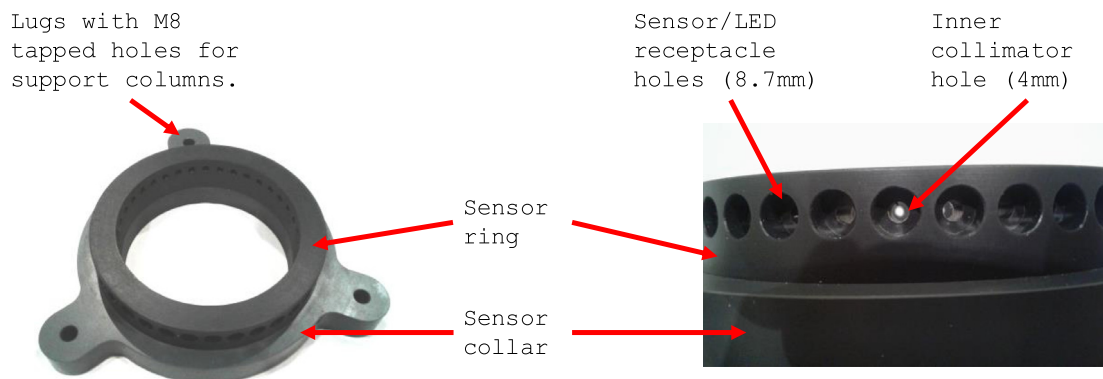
The sensor ring mounted in the sensor collar. The sensor/LED module receptacle holes (8.7 mm diameter) are shown along with the concentric 4 mm diameter inner collimator holes.
